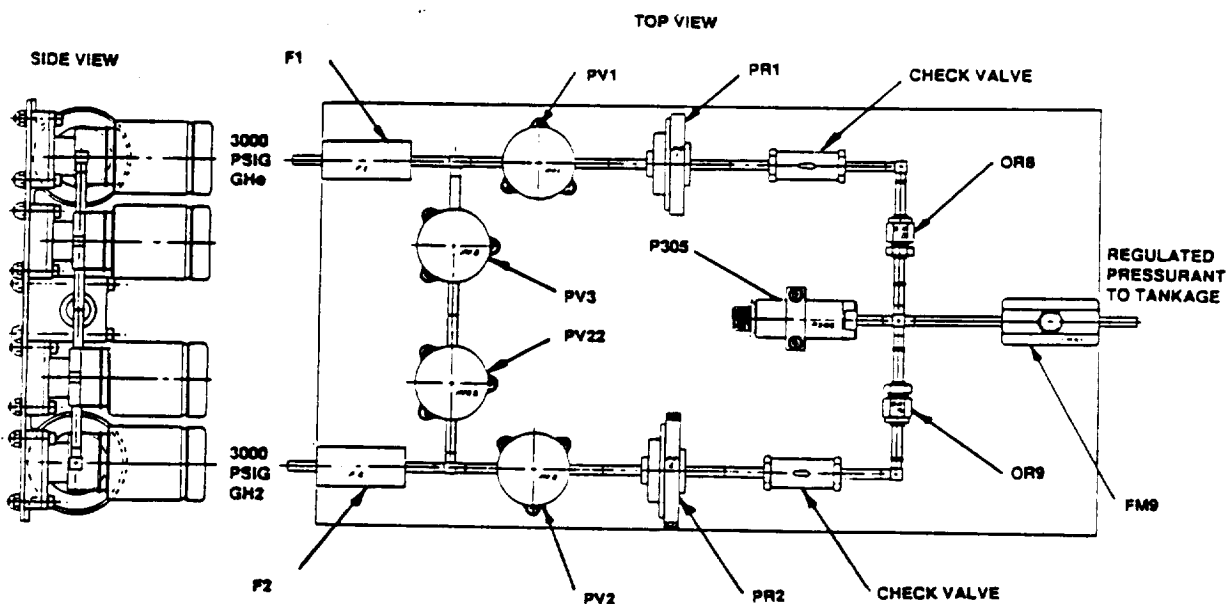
Valve Panel 3 Equipment Design Configuration
